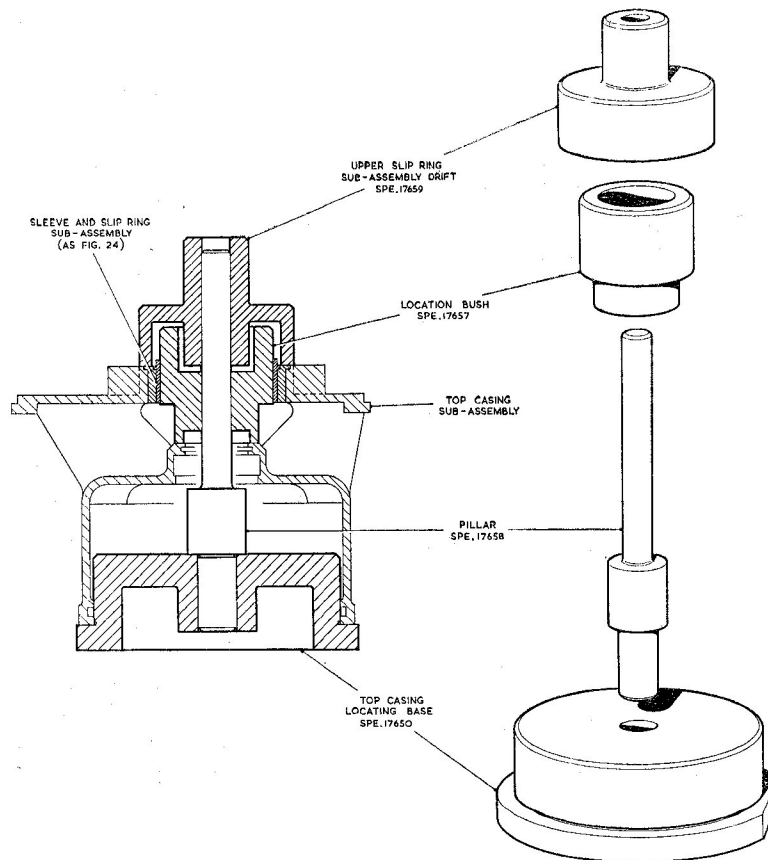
Tools for assembling the slip-ring/distance sleeve sub-assembly to the top casting
